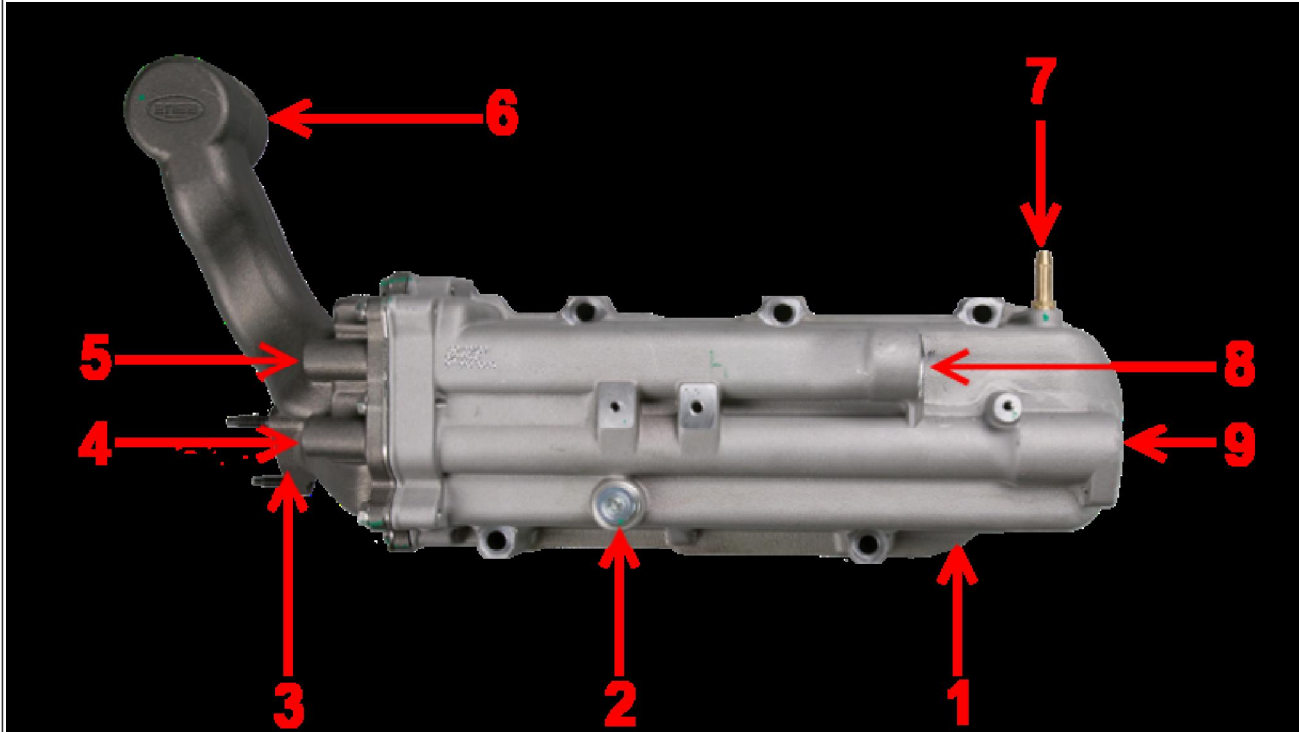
2010+ MaxxForce DT/9/10 EGR Cooler Assembly
